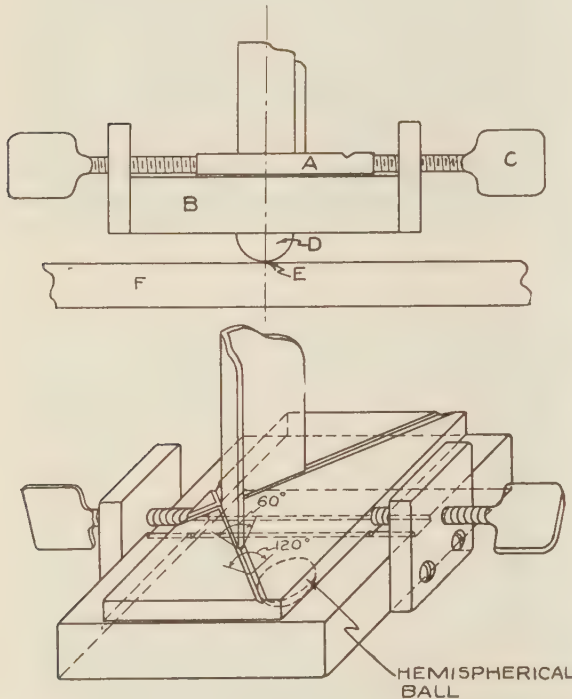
END BLOCKS SHOWING SEAT GROOVE AND ADJUSTMENTS
